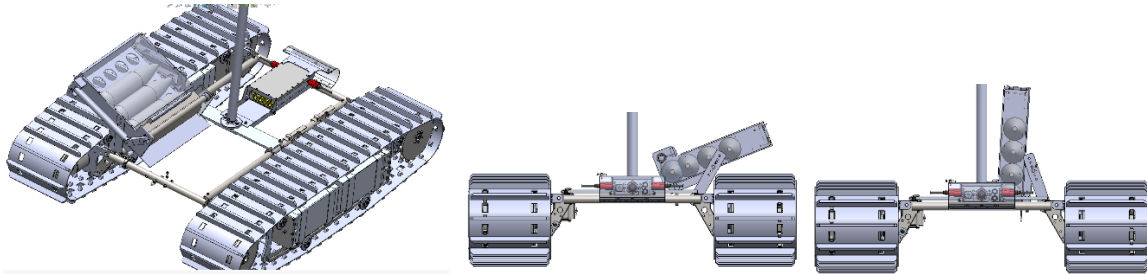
Roll-in-place Dispenser with Elevating Magazine.
